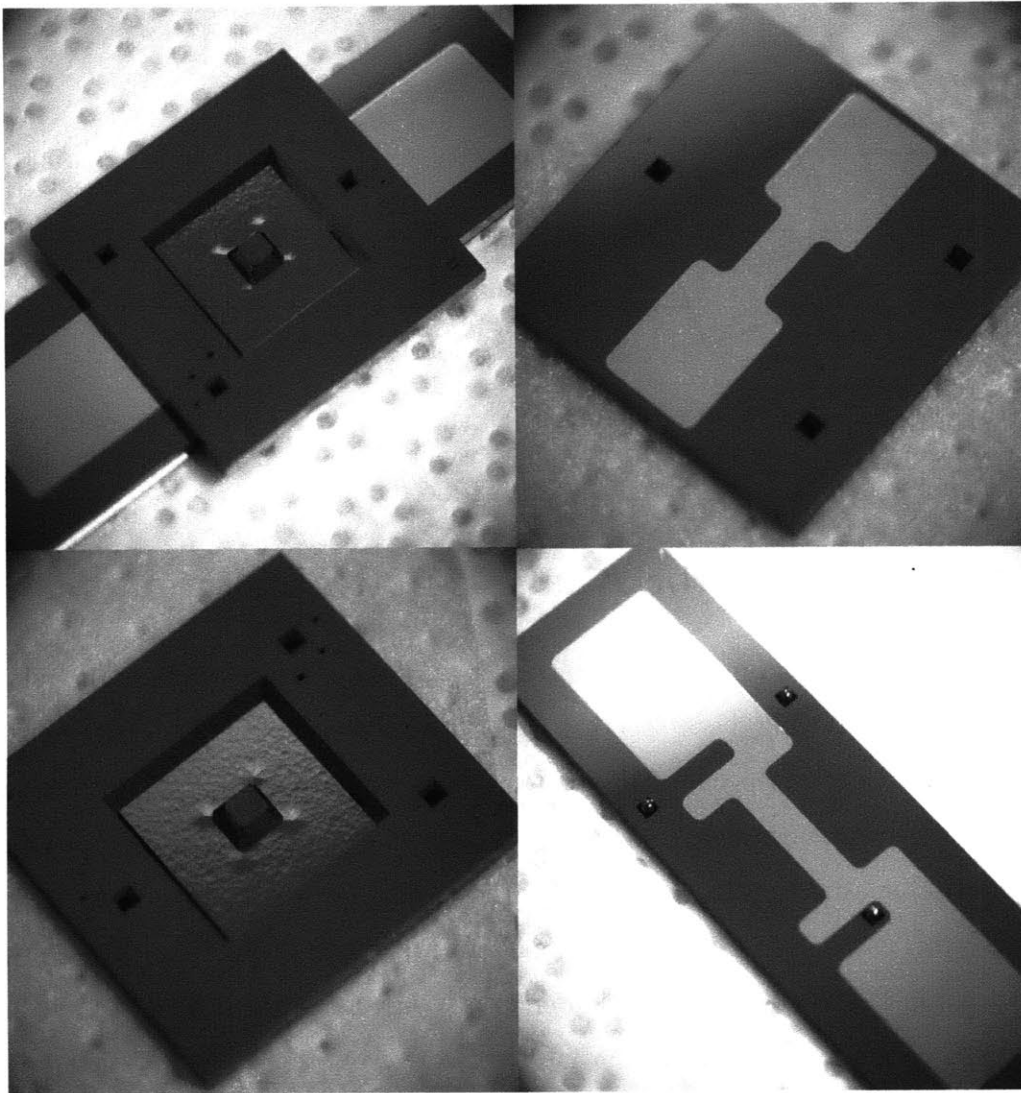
The assembled and disassembled kinematic coupling two-coupon system.
